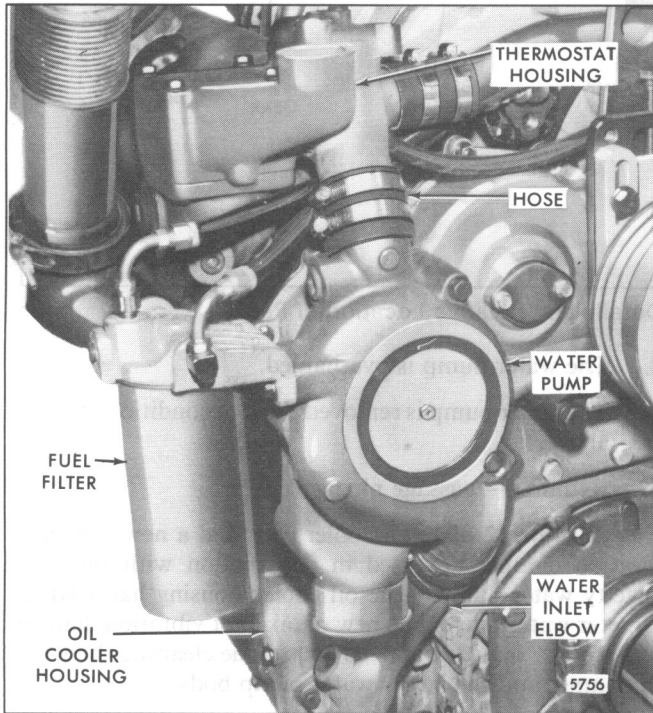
Water Pump Mounting (Former Cover with Spirolox Ring)
